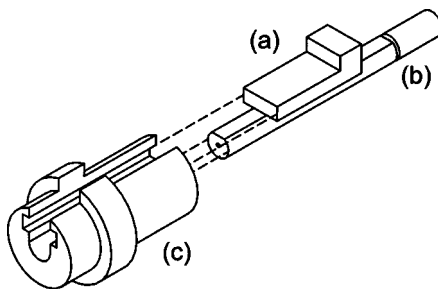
Optical fiber holder for rotation apparatus: (a) key; (b) optical fiber chuck with milled flat; and (c) chuck holder. The assembled device is inserted into the rotation stage [111].
